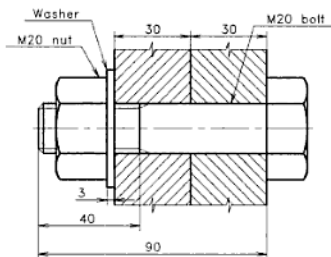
Assembly of hexagonal bolt, nut and a washer.
